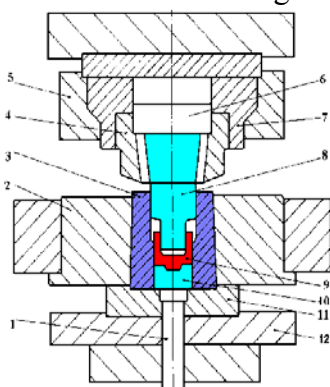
An extrusion assembly tool on the hydraulic press 250 tf WPA (TPS)
